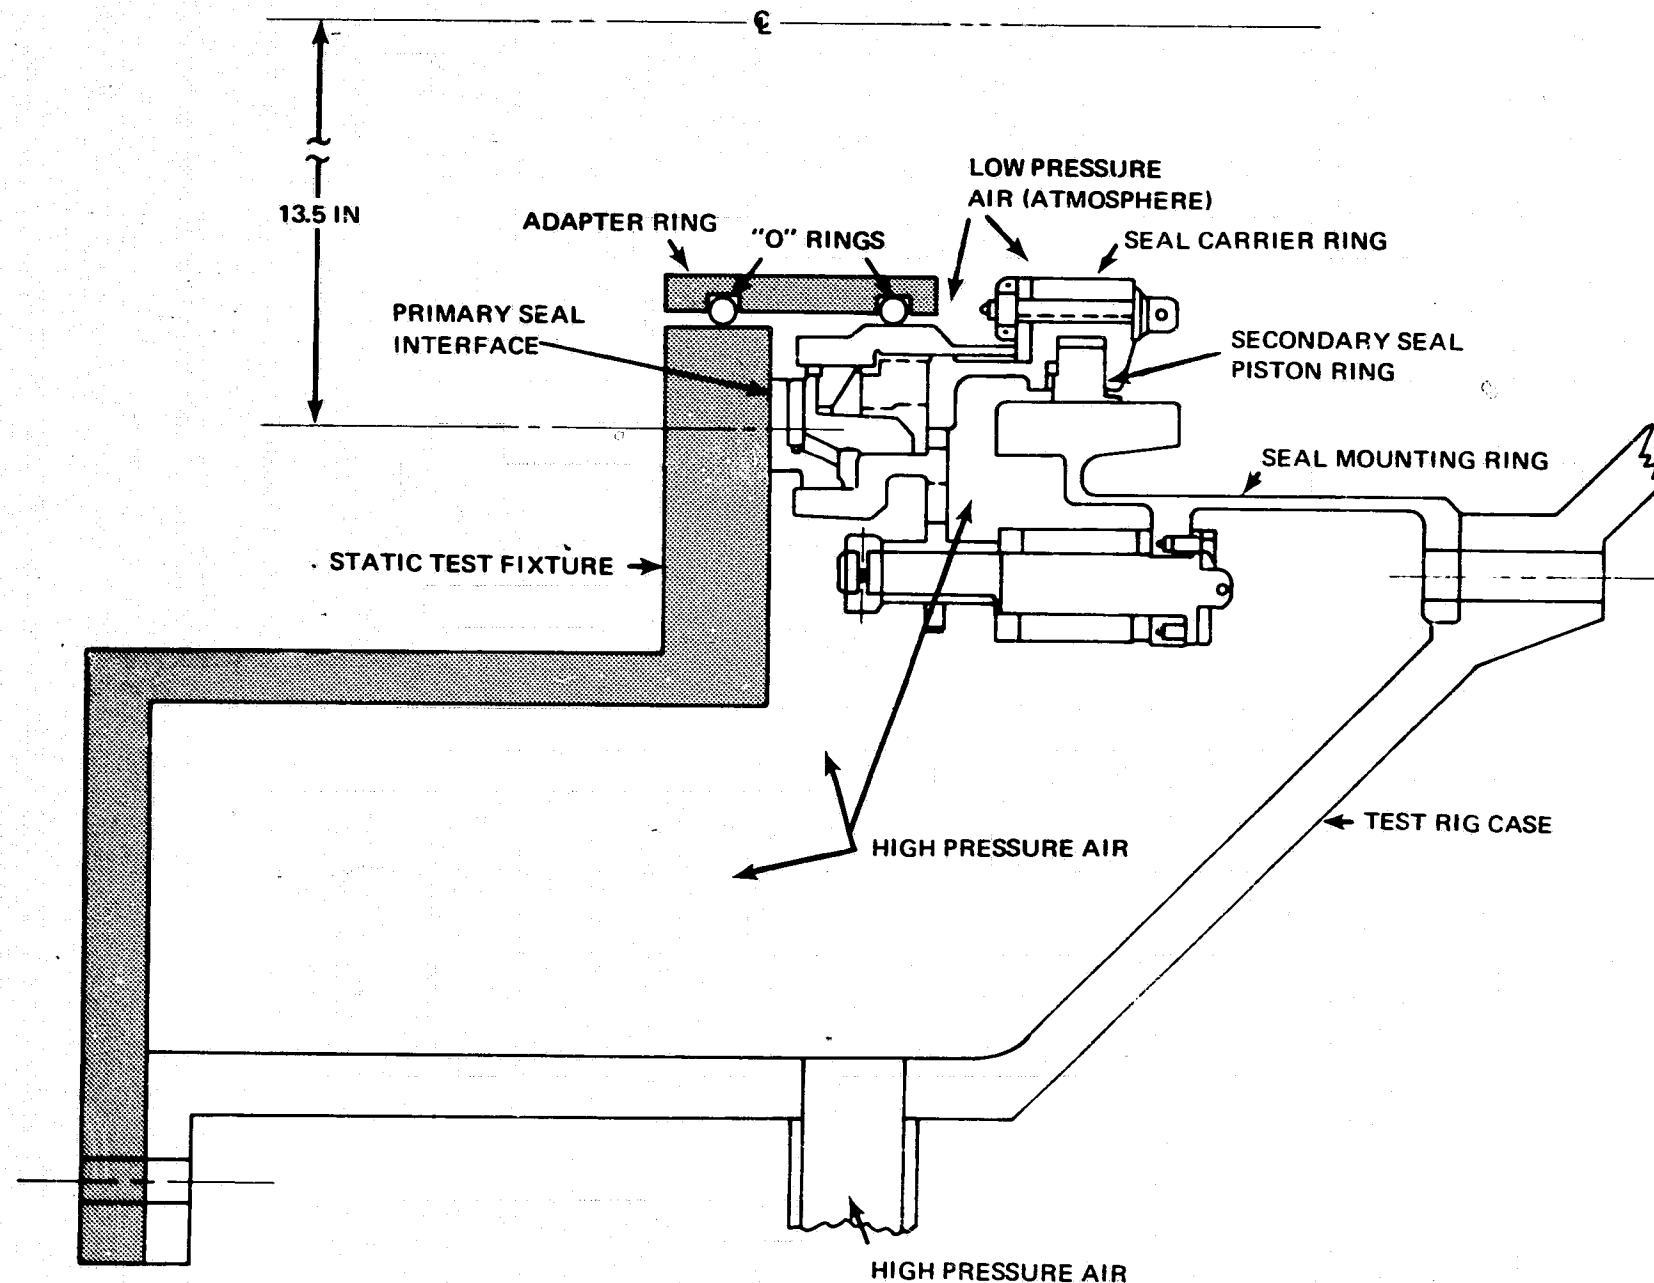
Cross Section of Fixture for Static Test of the One-Side Floated-Shoe End Seal
